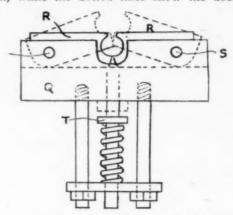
ELEVATION OF FORMING TOOLS FOR FINISHING BARREL:
